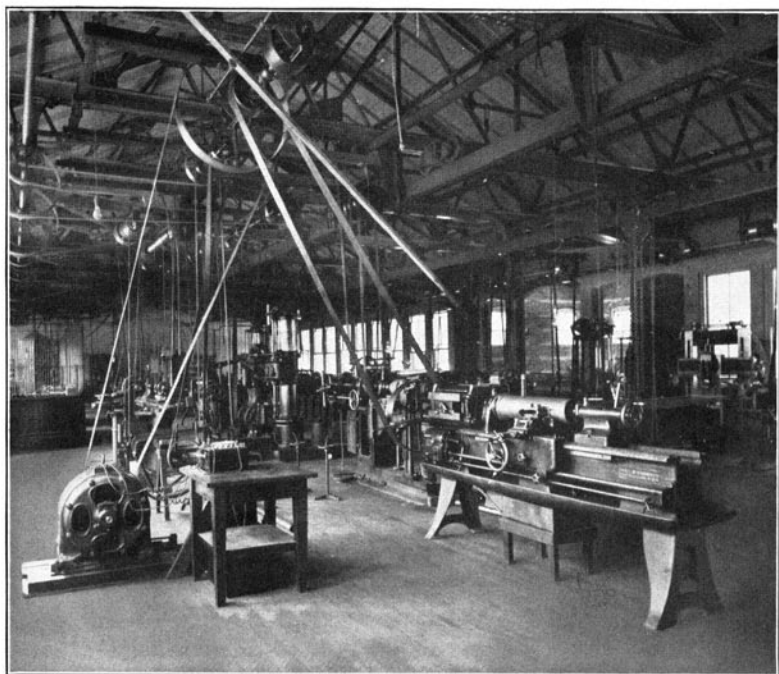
VIEW IN THE UNIVERSITY OF ILLINOIS MACHINE SHOP SHOWING LOCATION OF LATHE AND MOTOR DRIVE USED IN TESTS WITH HIGH-SPEED TOOL STEELS
